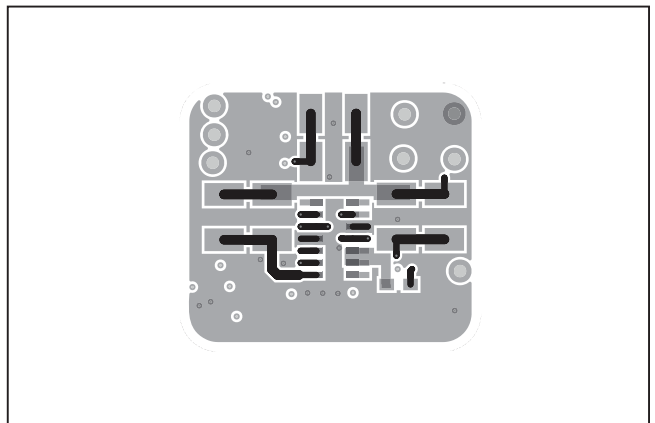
MAX30102 Daughter Board Component Placement Guide—Solder Side
